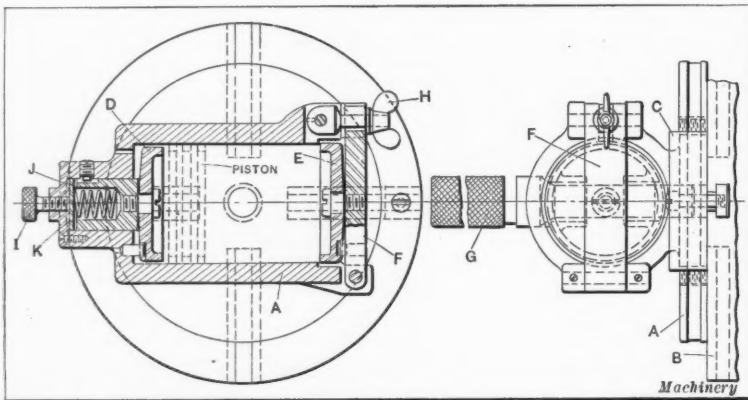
Detail View of Special Work-holding Fixture shown in Fig. 27
